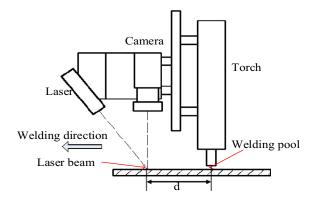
The schematic diagram of the weld seam tracking.
